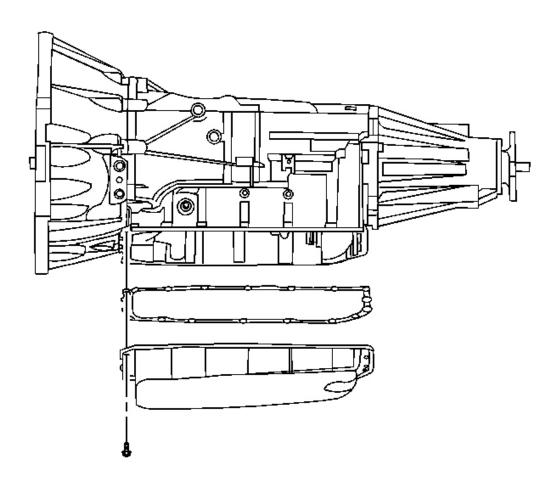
View Of Transmission Oil Pan & Filter Courtesy of GENERAL MOTORS CORP.
